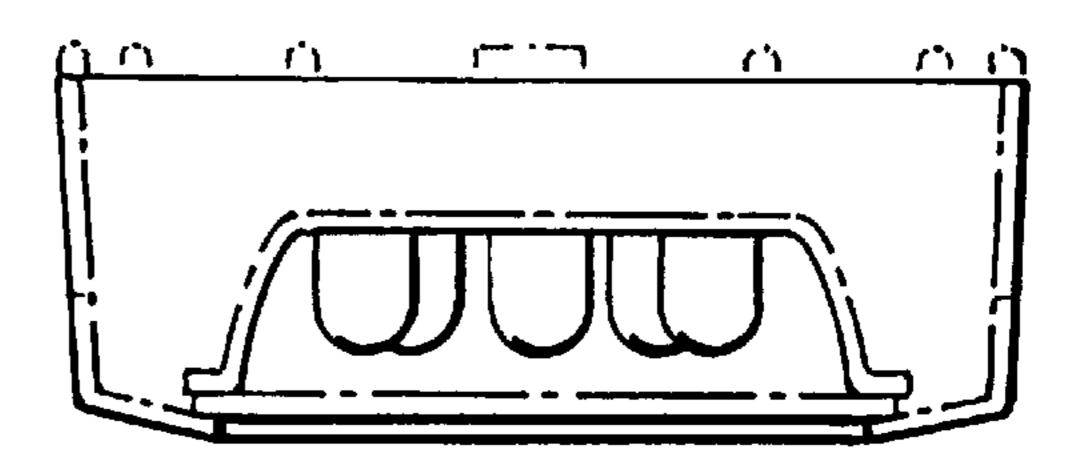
is a top plan, or back view of the fixture of FIG. 1;
